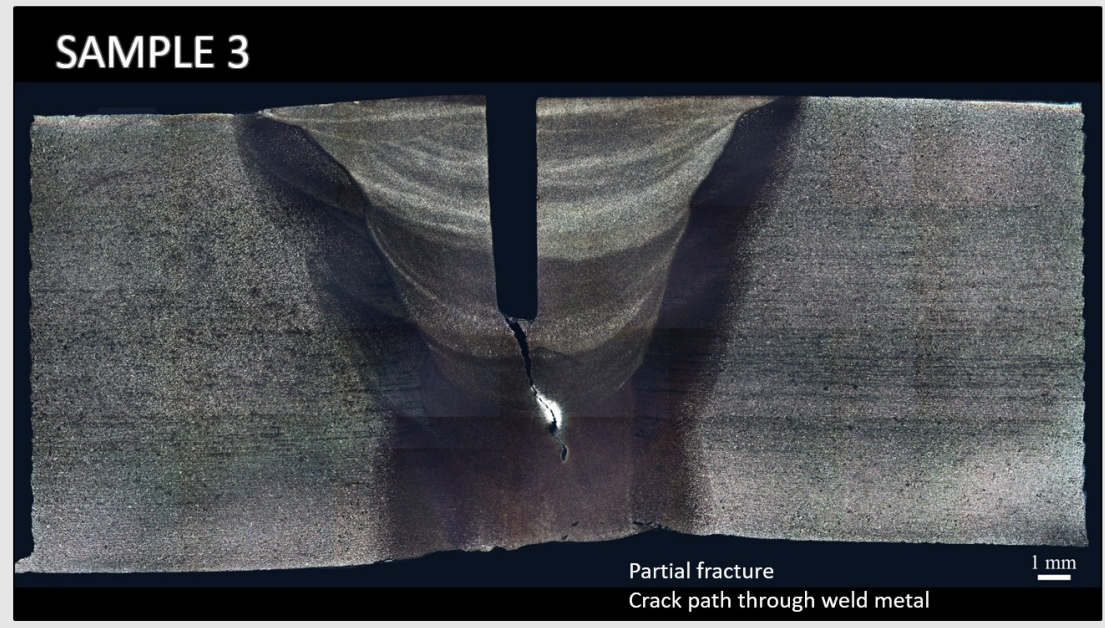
Photo showing the fracture analysis of sample 3, showing partial fracture crack through the weld metal.
